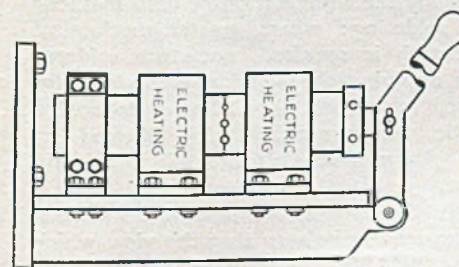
Hand-operated electrically heated portable press for effecting sleeve joints by soldering in aluminium wire. (See Fig. 5.)
